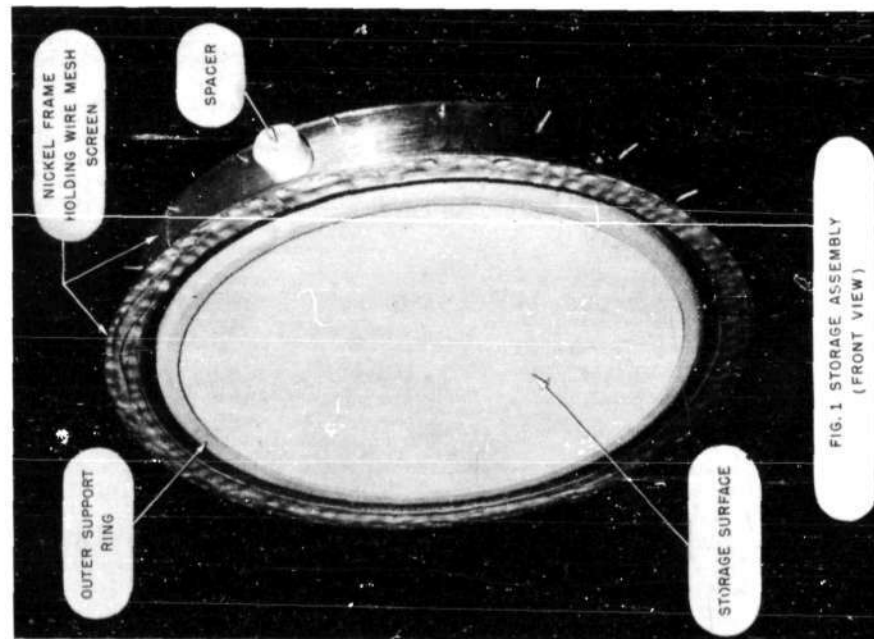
STORAGE ASSEMBLY (FRONT VIEW)
